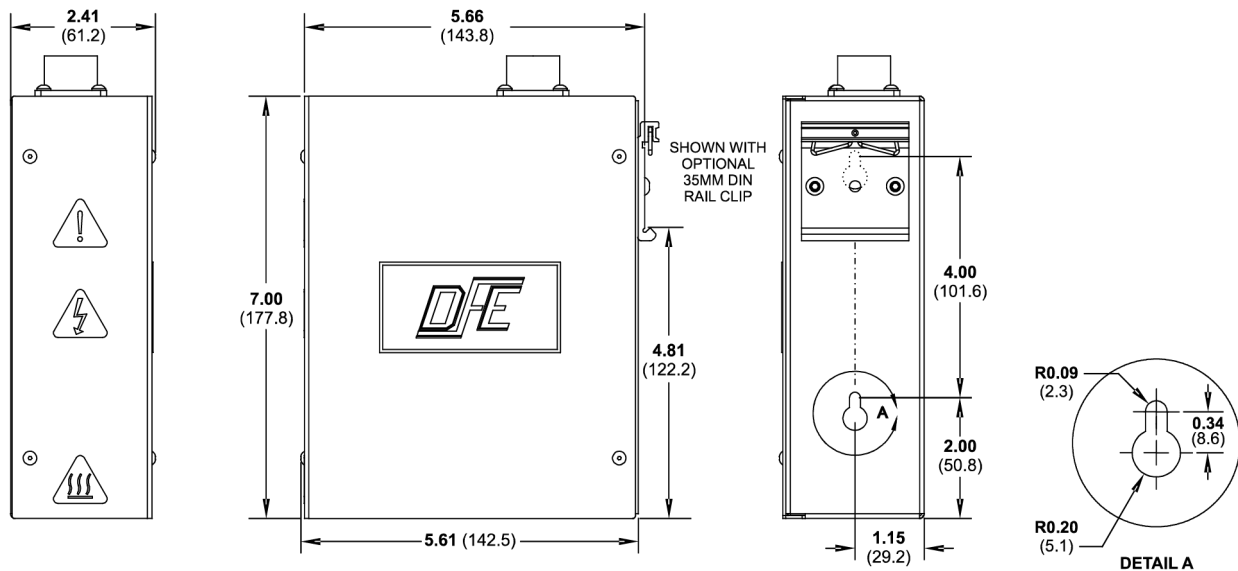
HIGH VOLTAGE OUTPUT ENCLOSURE DIMENSIONS FOR VERSION V
